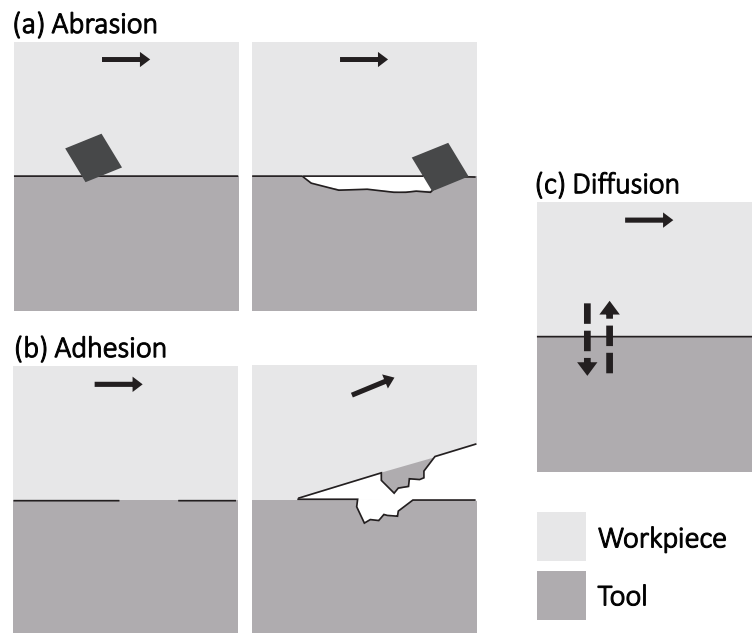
Illustrations of tool wear mechanisms occurring during metal cutting.
